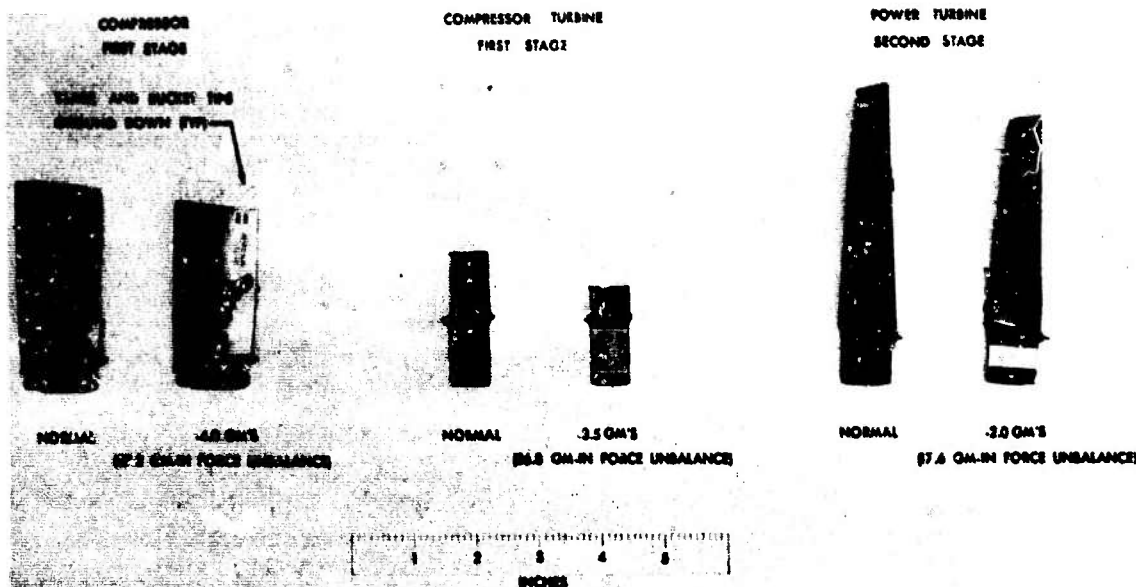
Unbalanced blades for the CH53A/T64-6 hot run-up test
